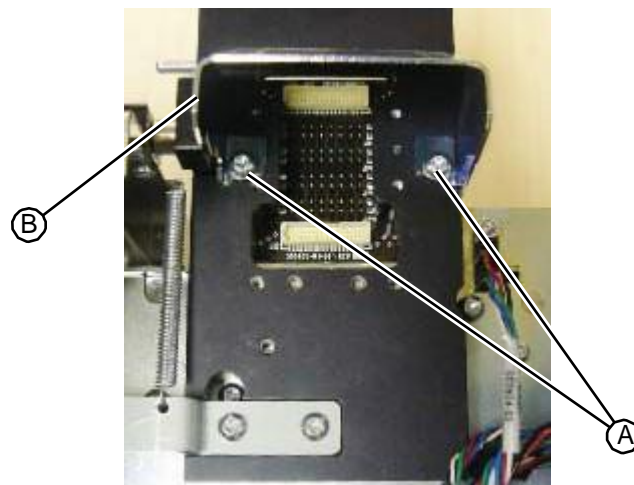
Test fixture cover fasteners attached to the back of the tester interface assembly
